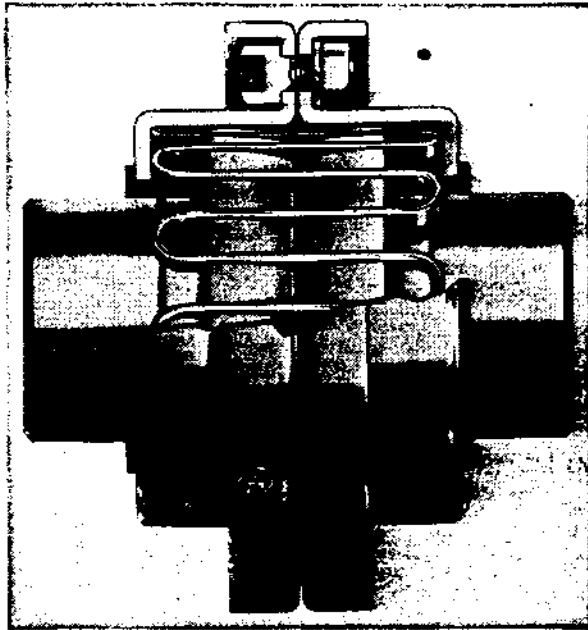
Flexible coupling of the steel-spring-grid type.
